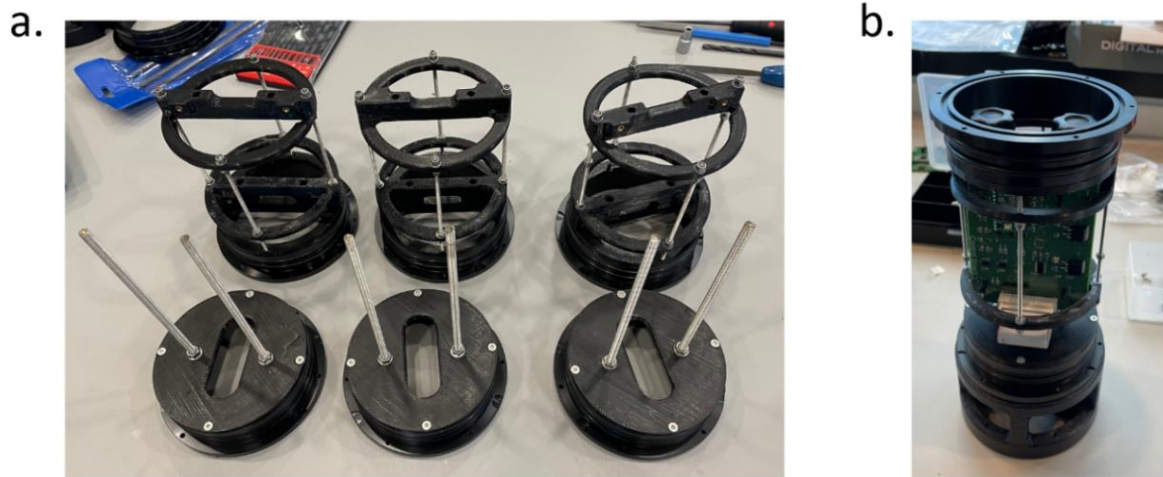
Assembly of the first three prototype sensor units (units 1-3) as design version 3. (A) FDM 3D Printed internal frames using M3 steel rods as spacers. (B) Assembled internal systems of the sensor.
